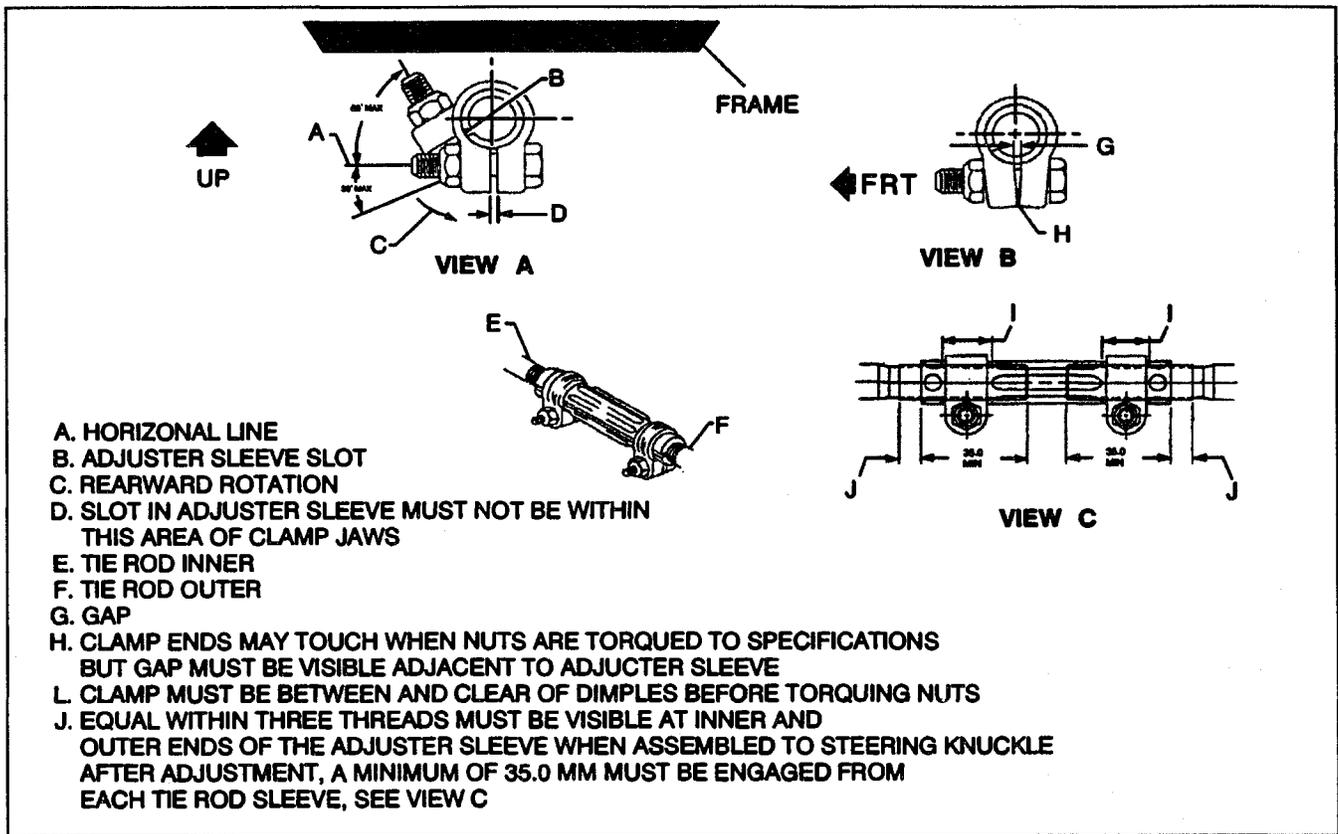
Tie Rod Clamp and Adjuster Tube Positioning
